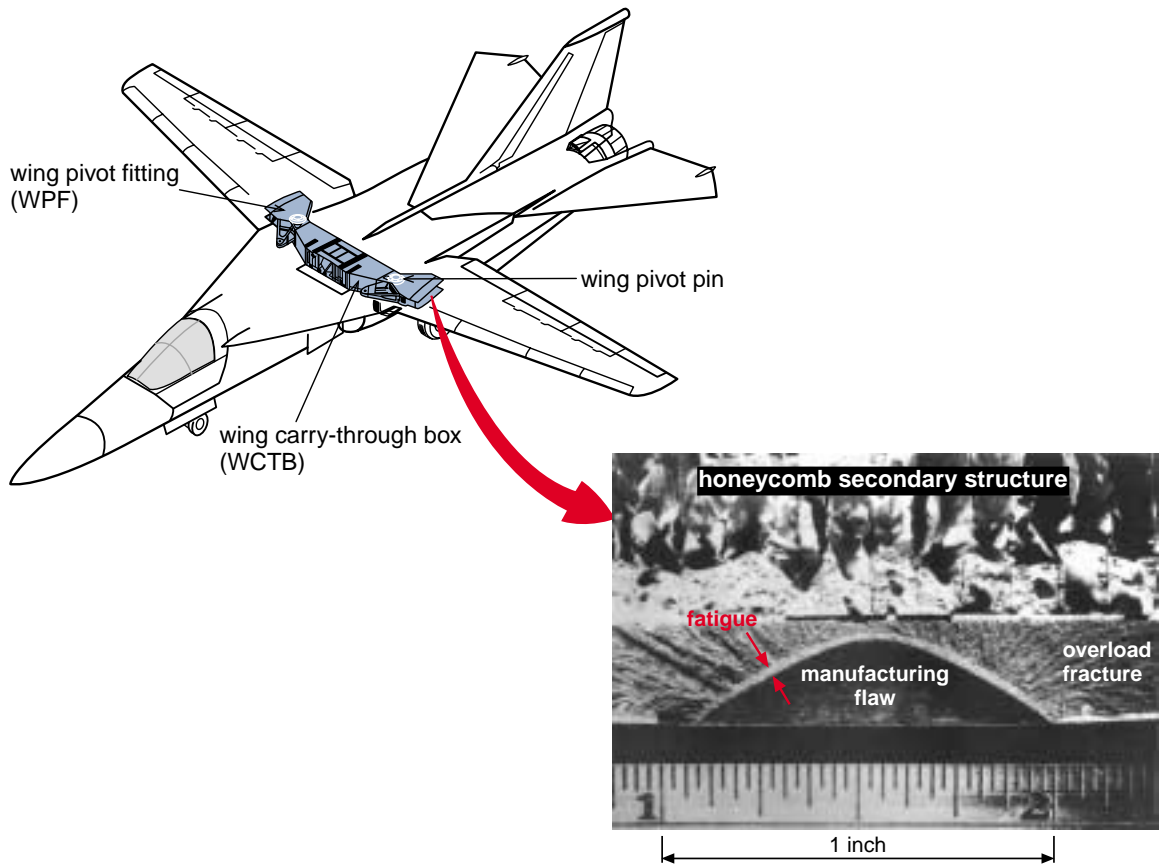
Failure origin of F-111 #94: a manufacturing flaw in the high-strength steel lower plate of the left-hand wing pivot fitting
